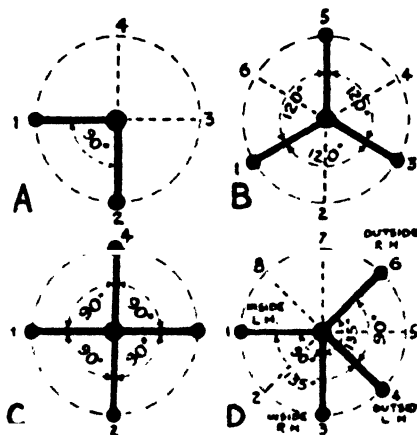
Arrangement of Cranks.—2, 3, and 4-Cylinder Engines.
